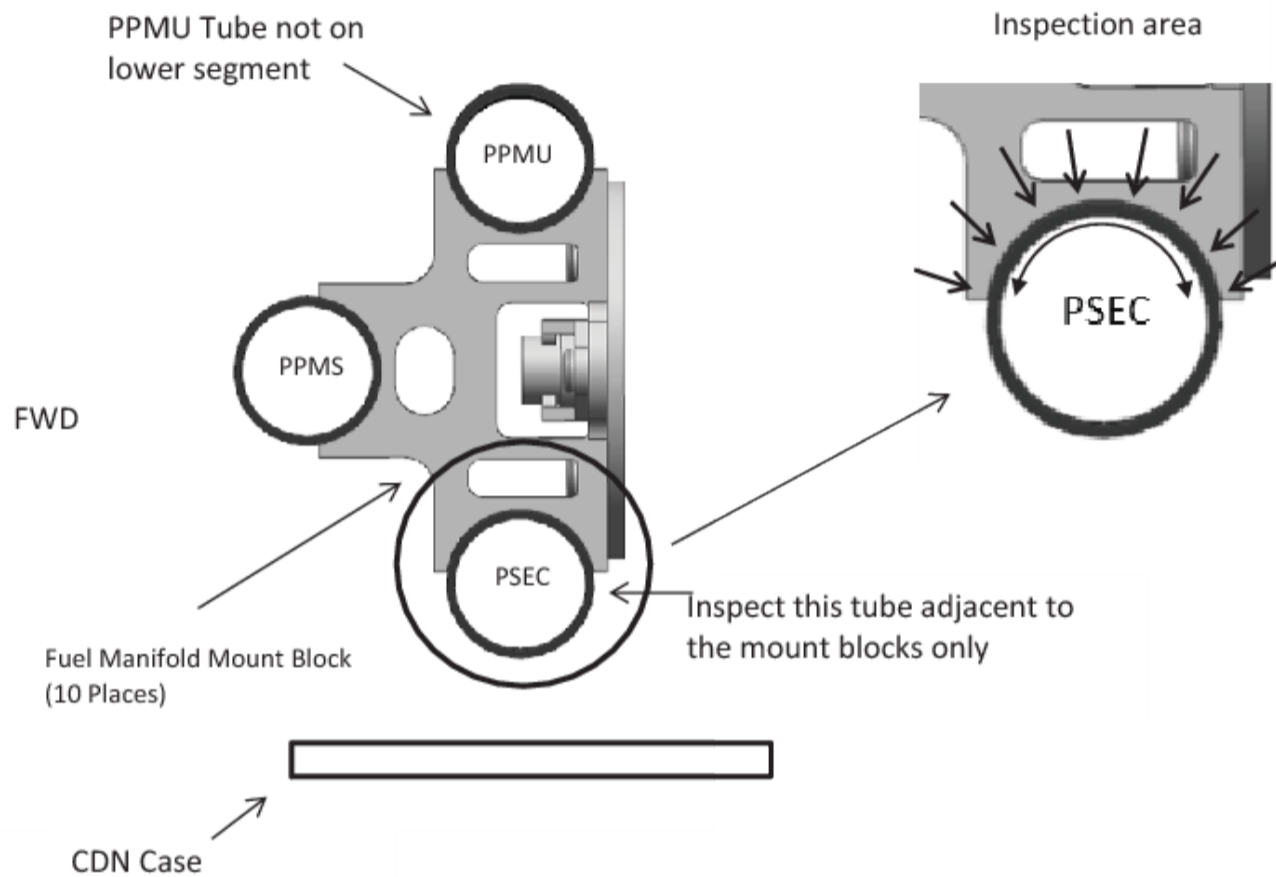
FUEL MANIFOLD TUBE IDENTIFICATION AND INSPECTION AREA
